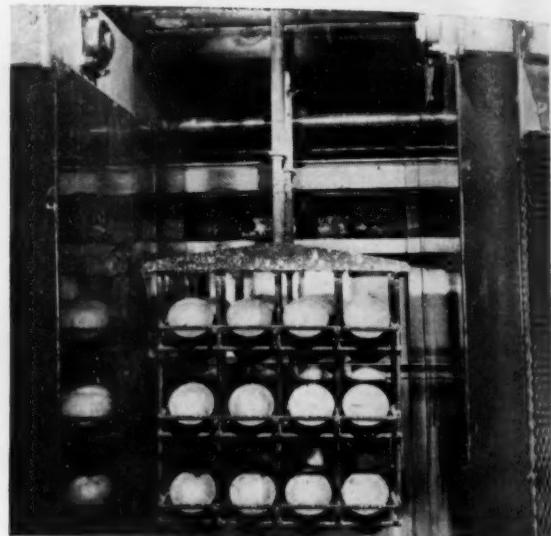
Special racks are used to convey a batch of parts through two Ajax salt baths. Parts move through the baths automatically on conveyors which eliminate all manual handling.
